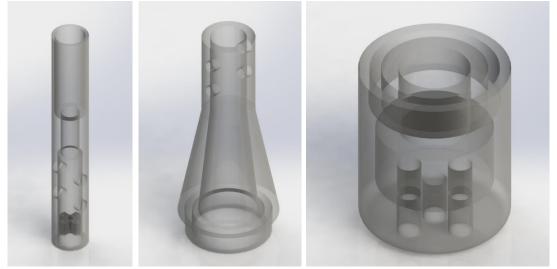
Bougie Shaft Connector (Left), Bougie Shaft Holder (Centre), Bougie Shaft Snap On Lid (Right)
